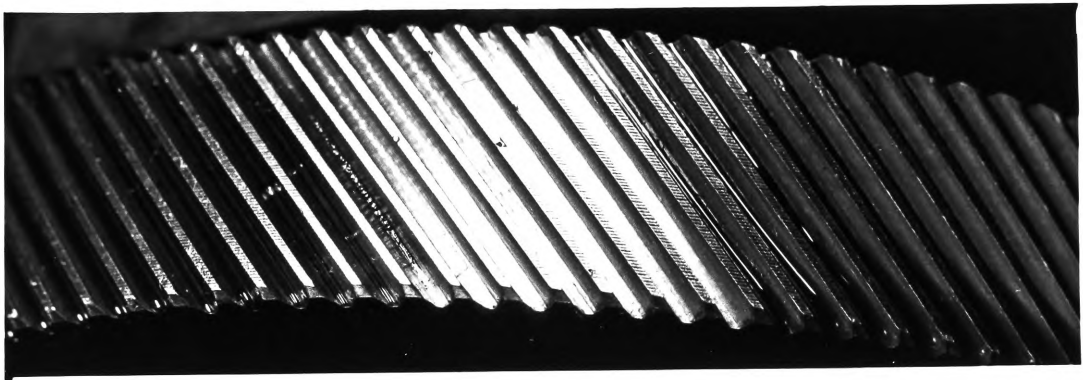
TEETH OF GEAR SET 3 WHEEL - 8695 HOURS
